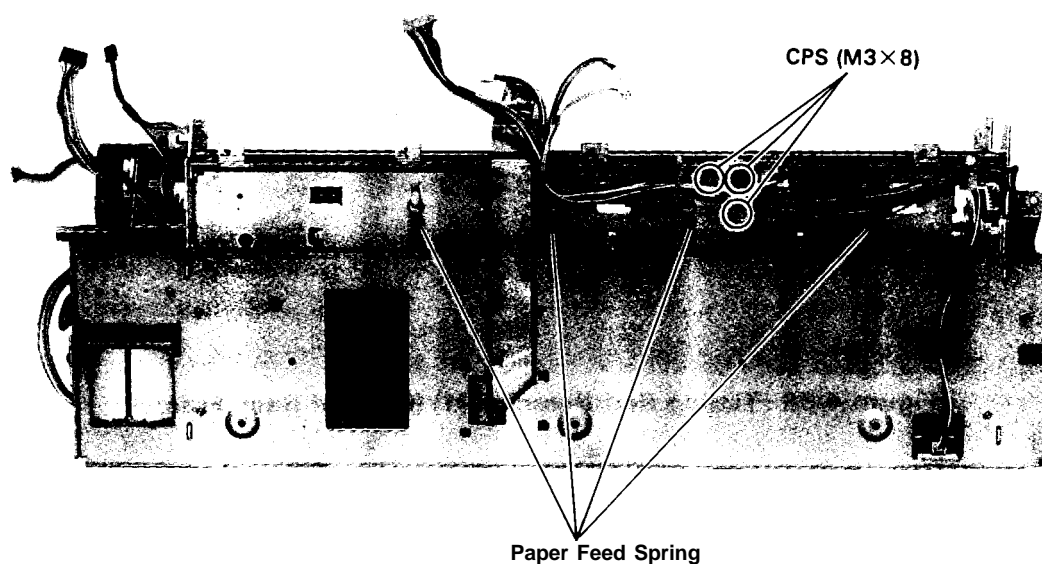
Paper Feed Spring Removal (Back of Base Frame)
